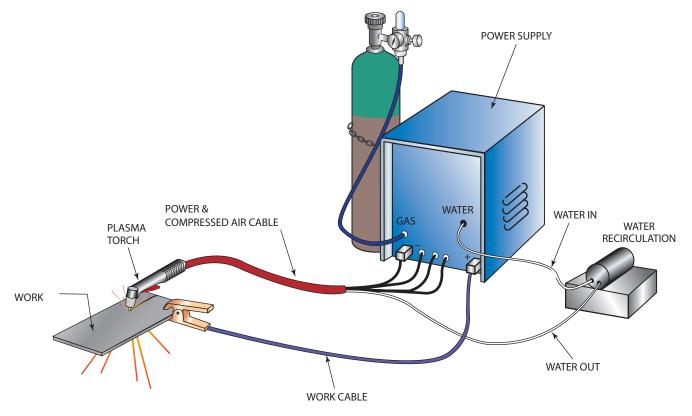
Inverter type plasma arc cutting power supply.
